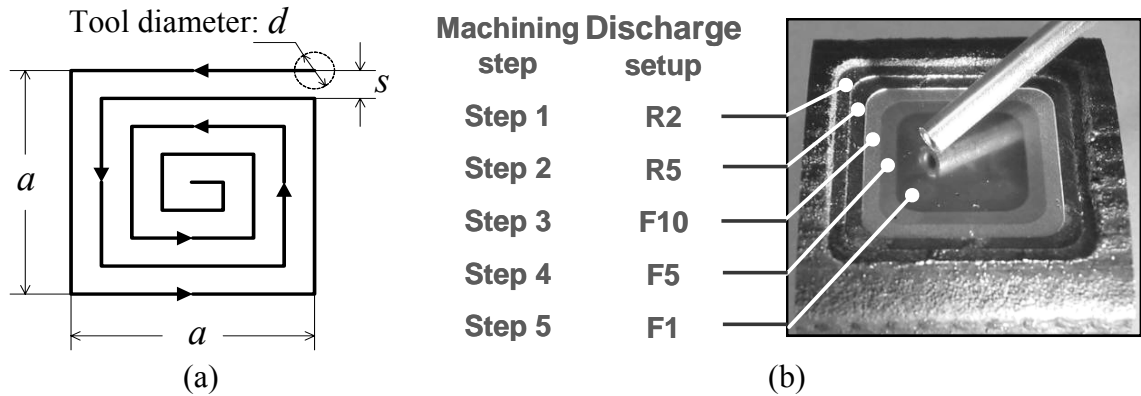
Flat surface milling with integrated dry and near-dry EDM, (a) tool path and (b) finished mirror surface.
